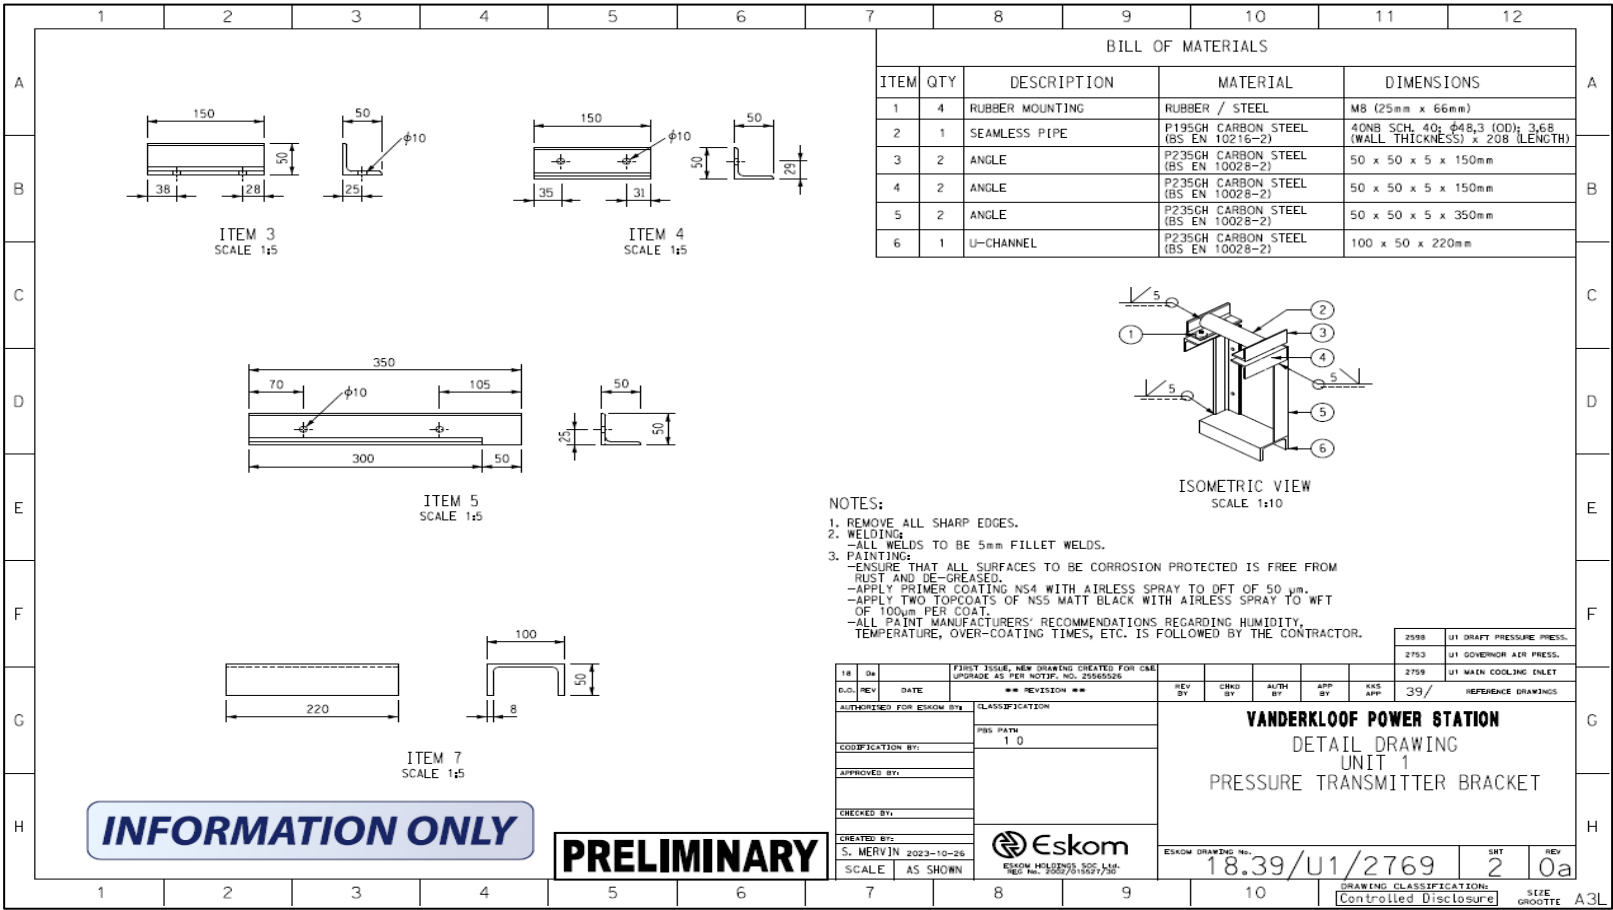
Detail Drawing Single Pressure Transmitter Bracket
